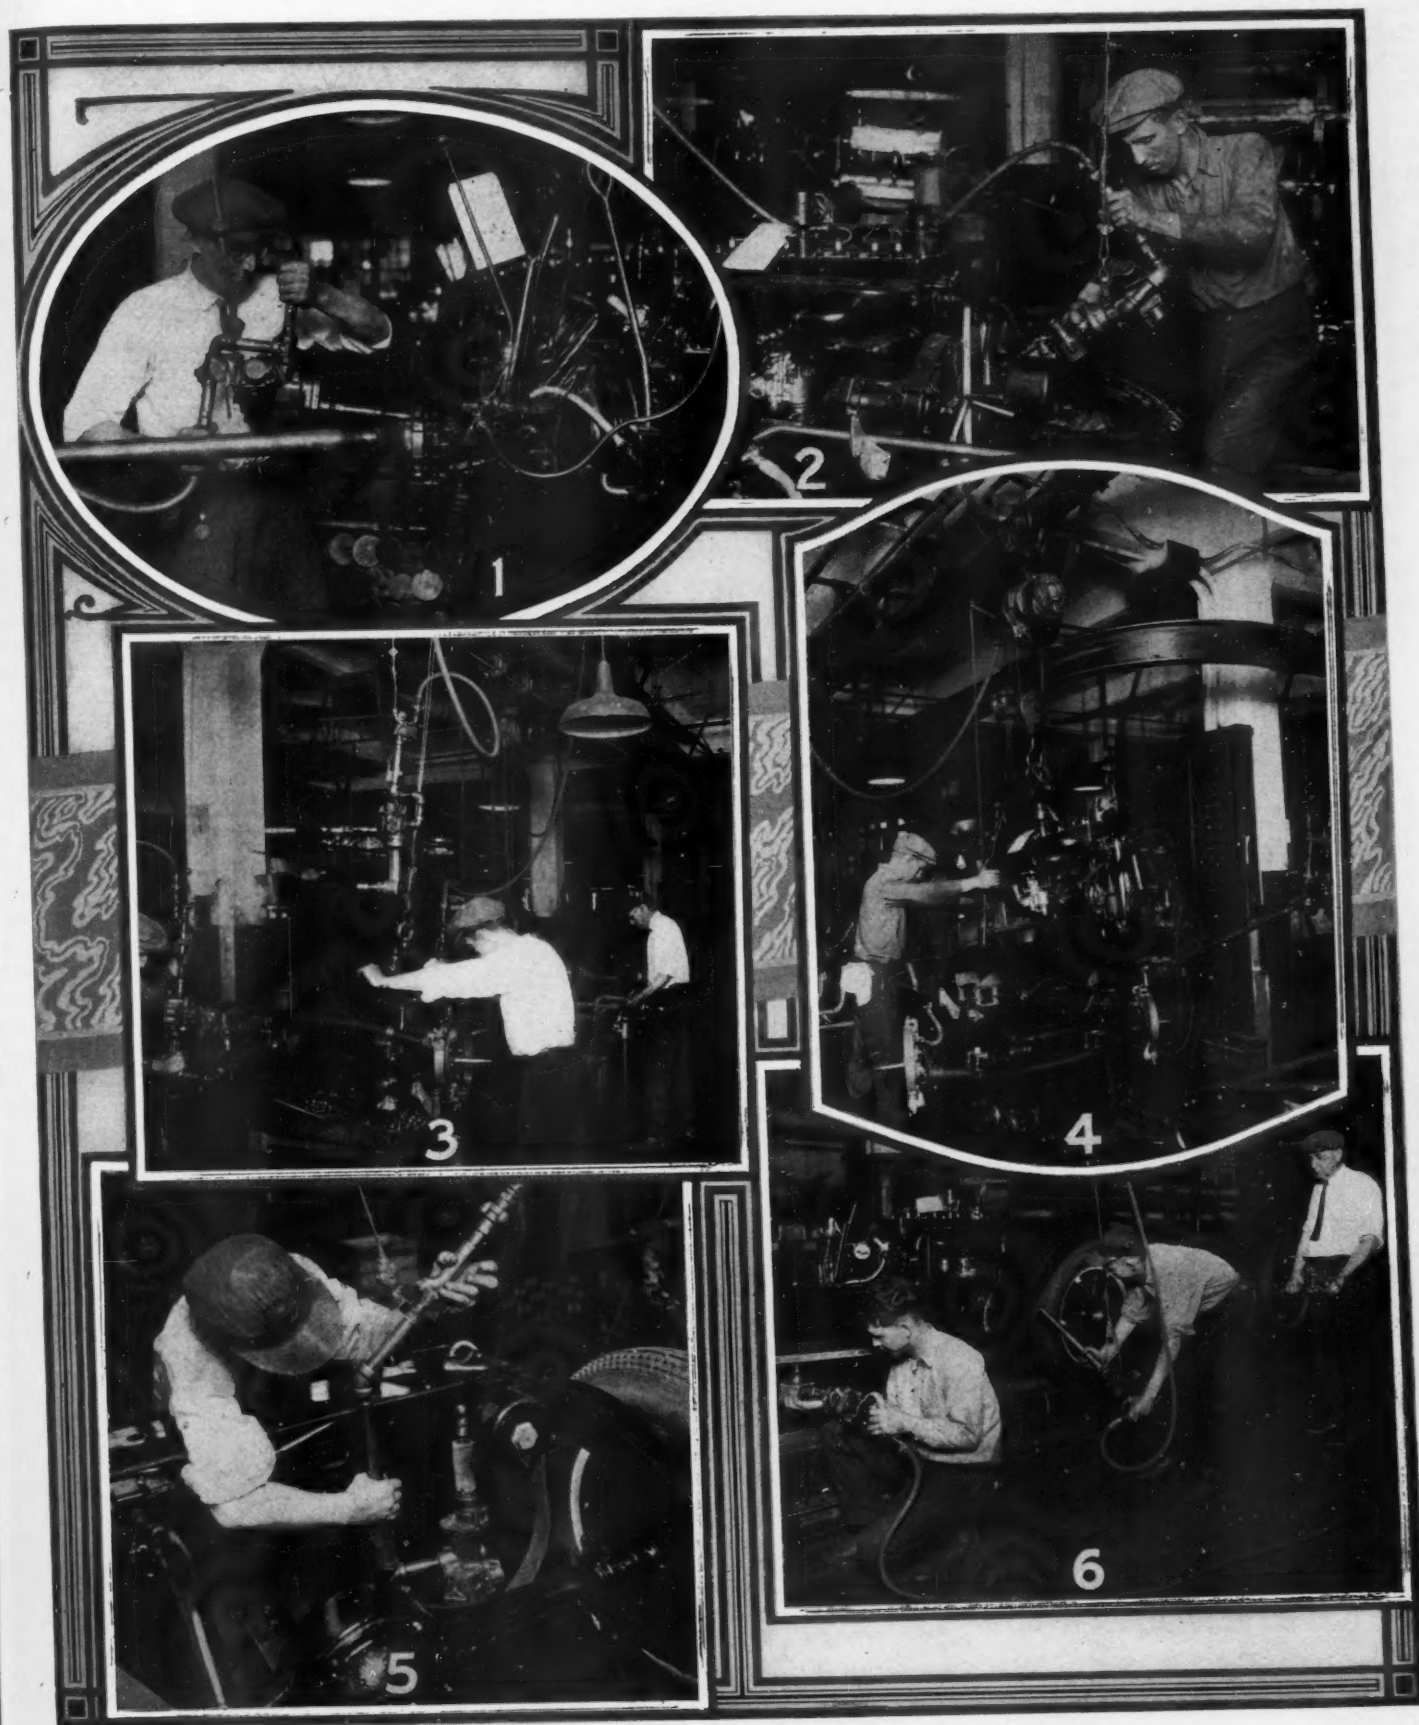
Tightening bolts of universal joint on propeller shaft.
